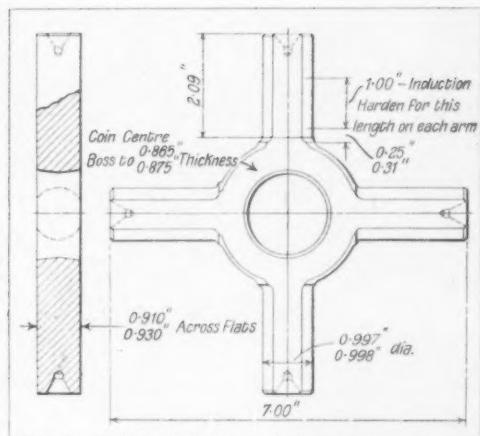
The differential spider which carries the intermediate gears in the rear axles of large Ford commercial vehicles is machined from an alloy steel forging
